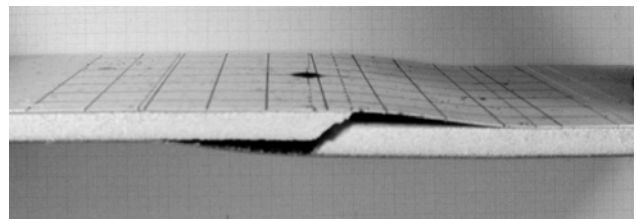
Fully developed sandwich panel shear failure with extensive debonding between core and face-sheets.
